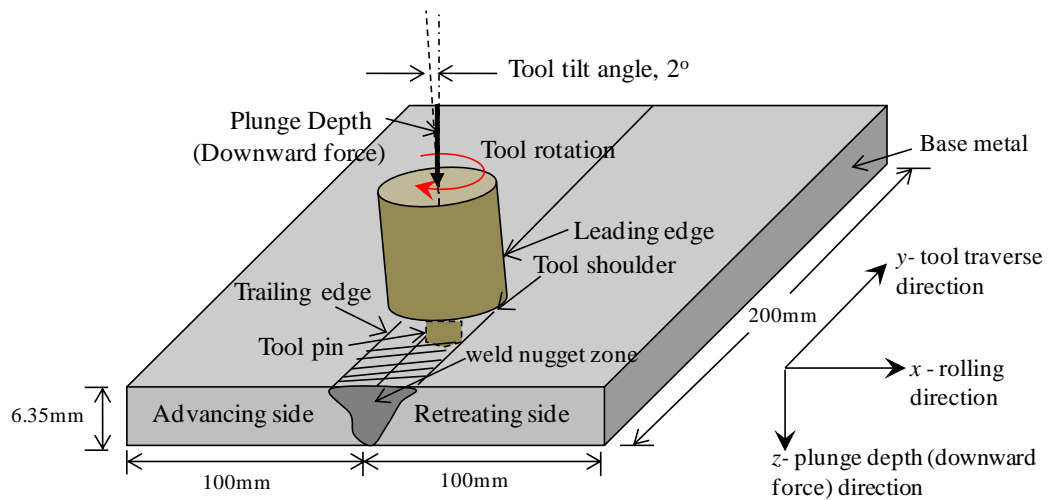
Schematic representation of friction stir welding process.
